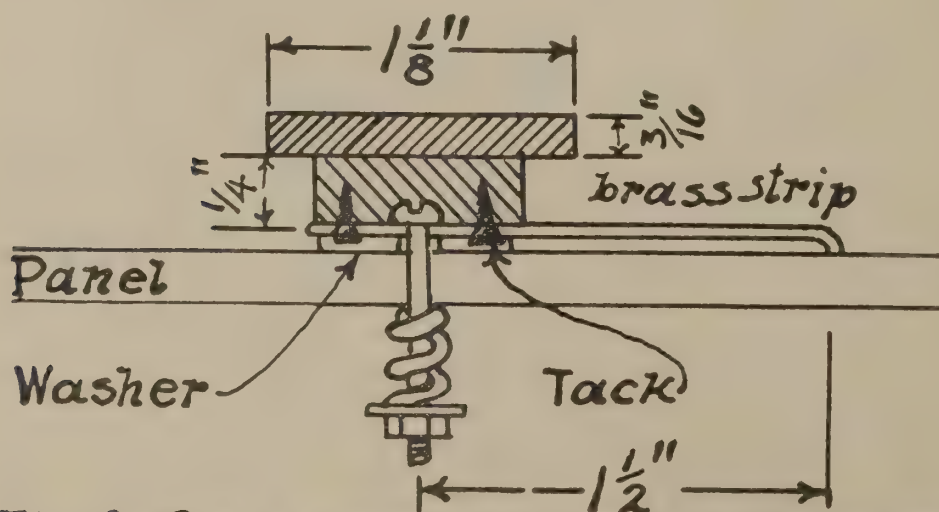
, Cross section of switch showing how knob and bolt are joined to brass strip
